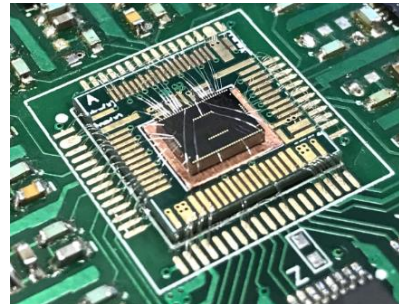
(a) shows the photograph of the TIMU prototype board. Because the MEMS die has so many pads that need to be wire bonded to the PCB, a transposer board is needed for the following purposes:
